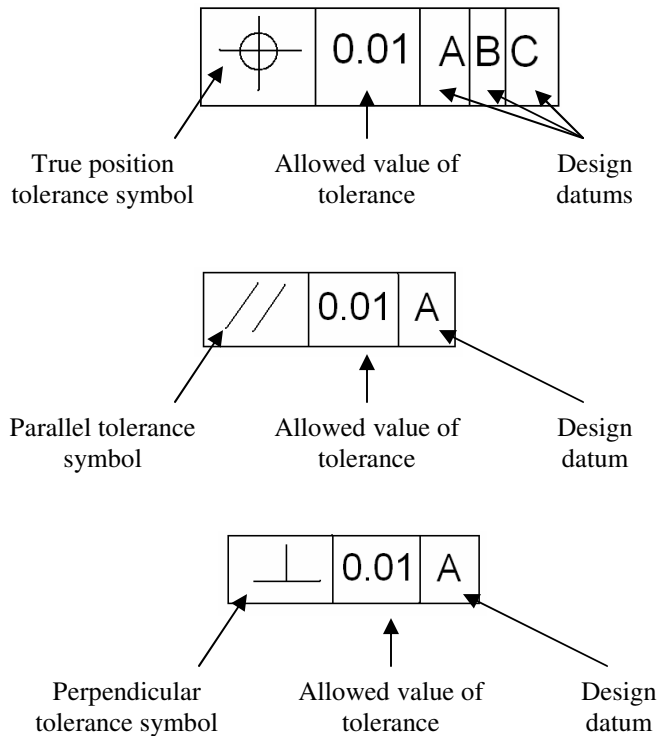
True position, parallel, and perpendicular tolerance specifications
